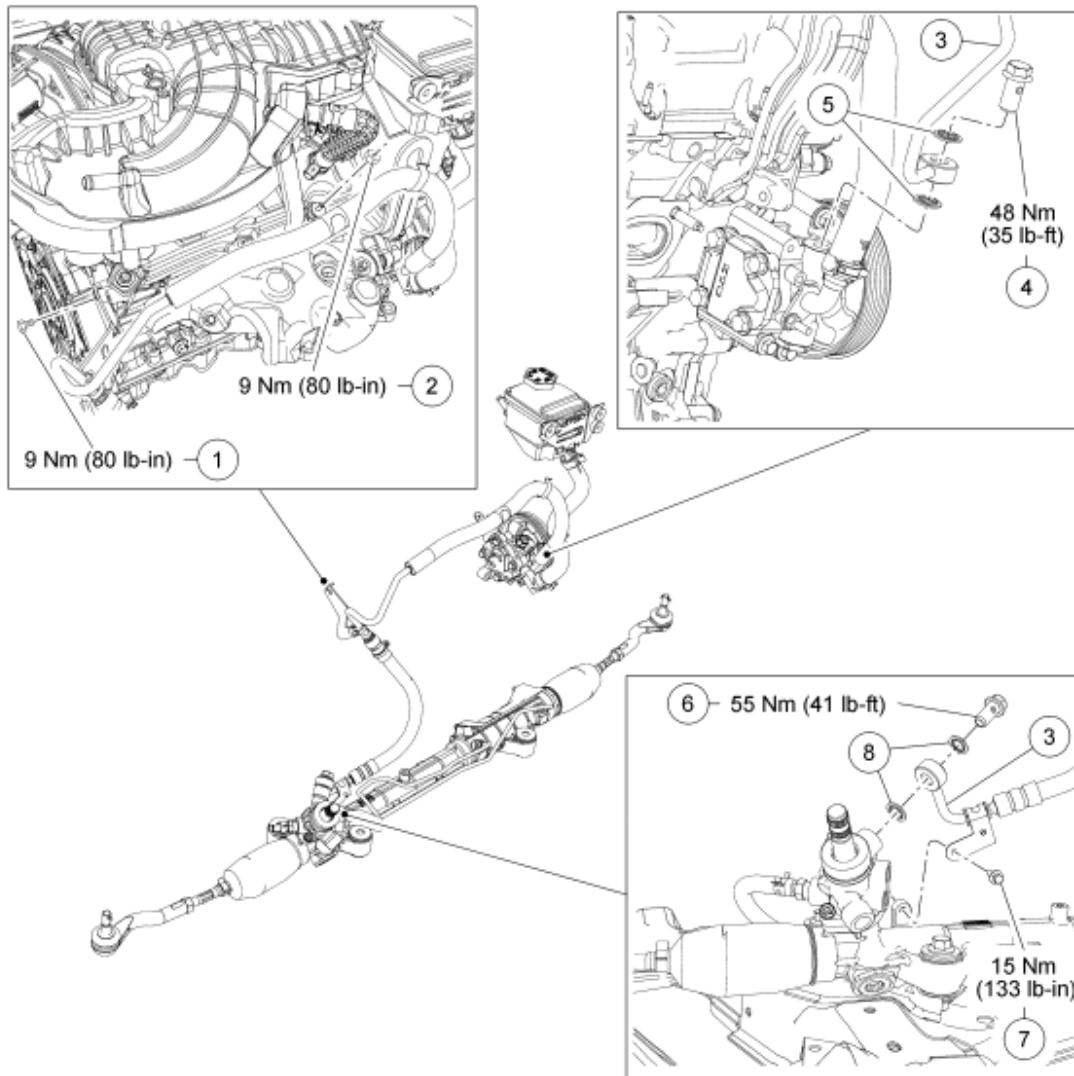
Exploded View Of Power Steering Pump to Steering Gear Pressure Line With Torque Specifications - 3.5L Engine
